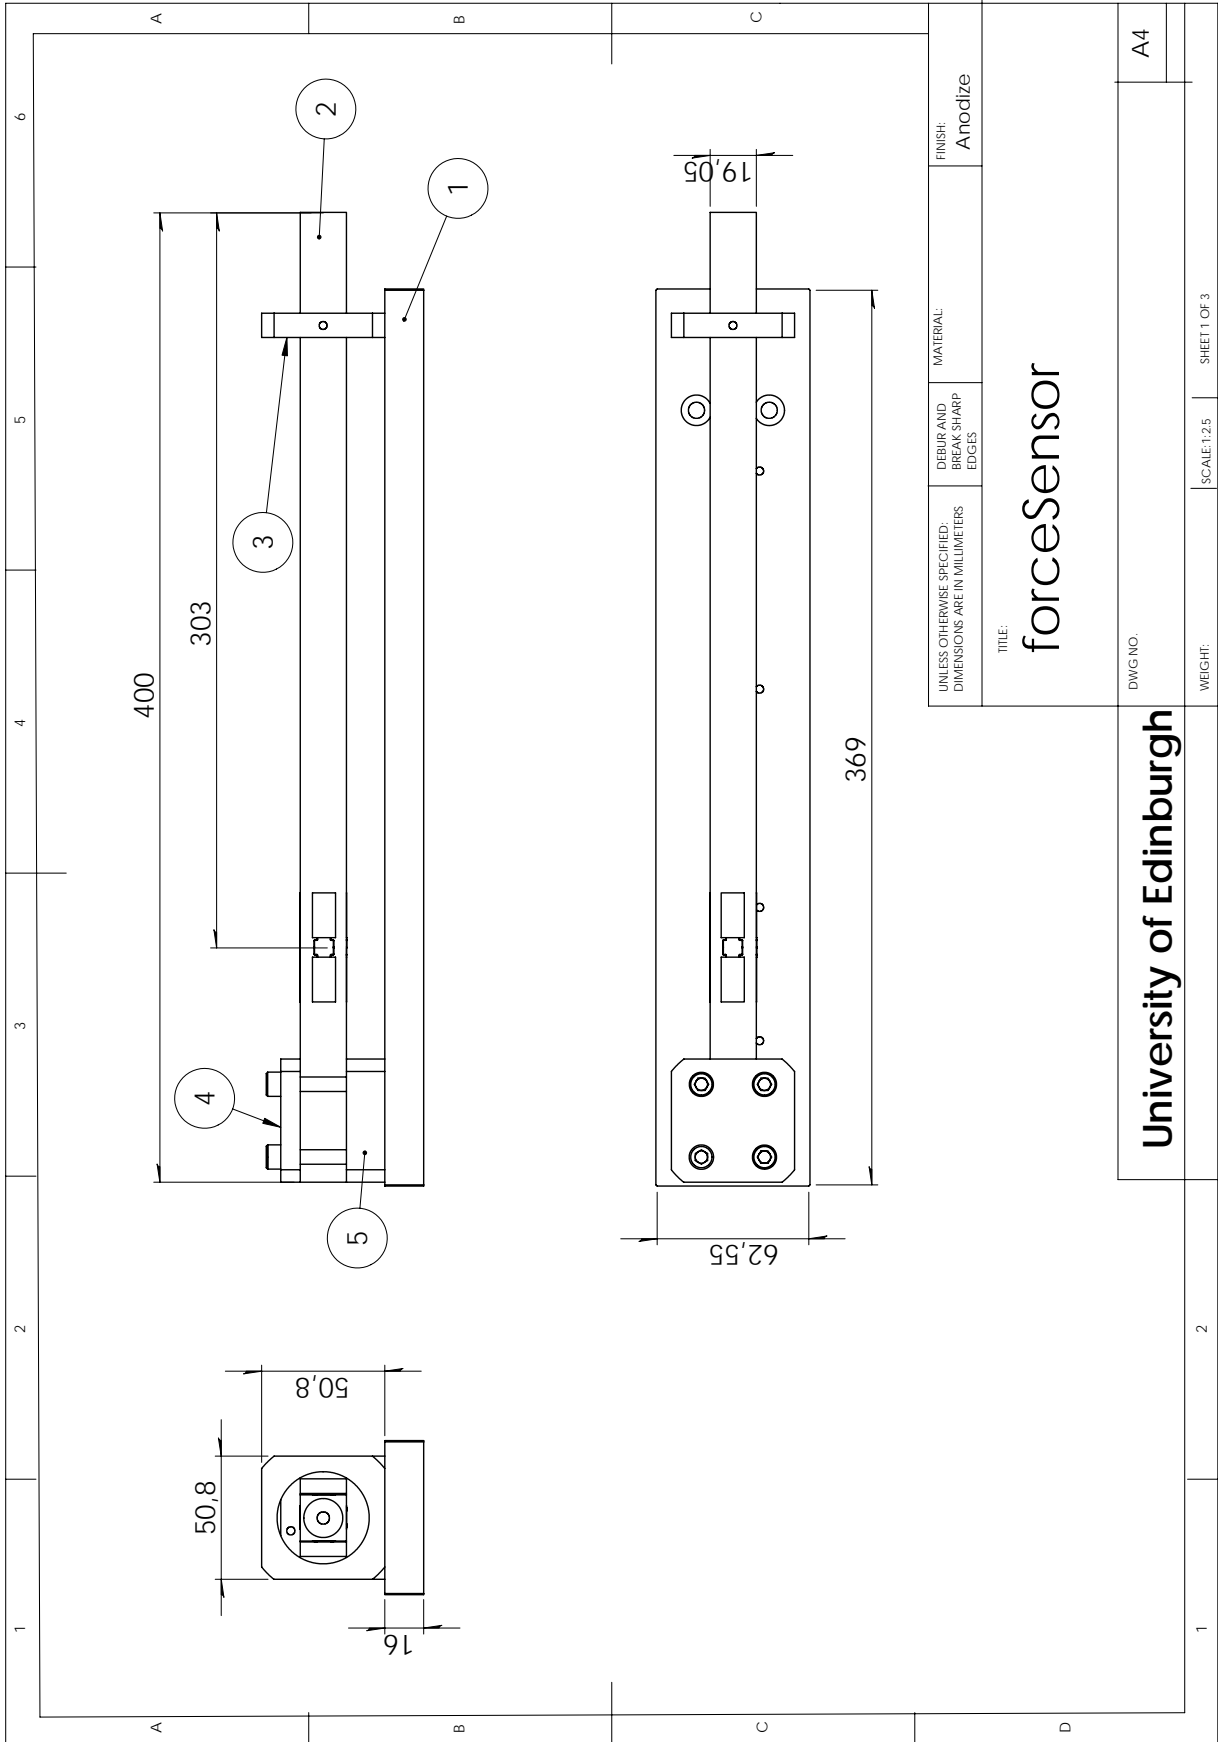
Assembly drawing for the force sensor (scale 1:2.5).
